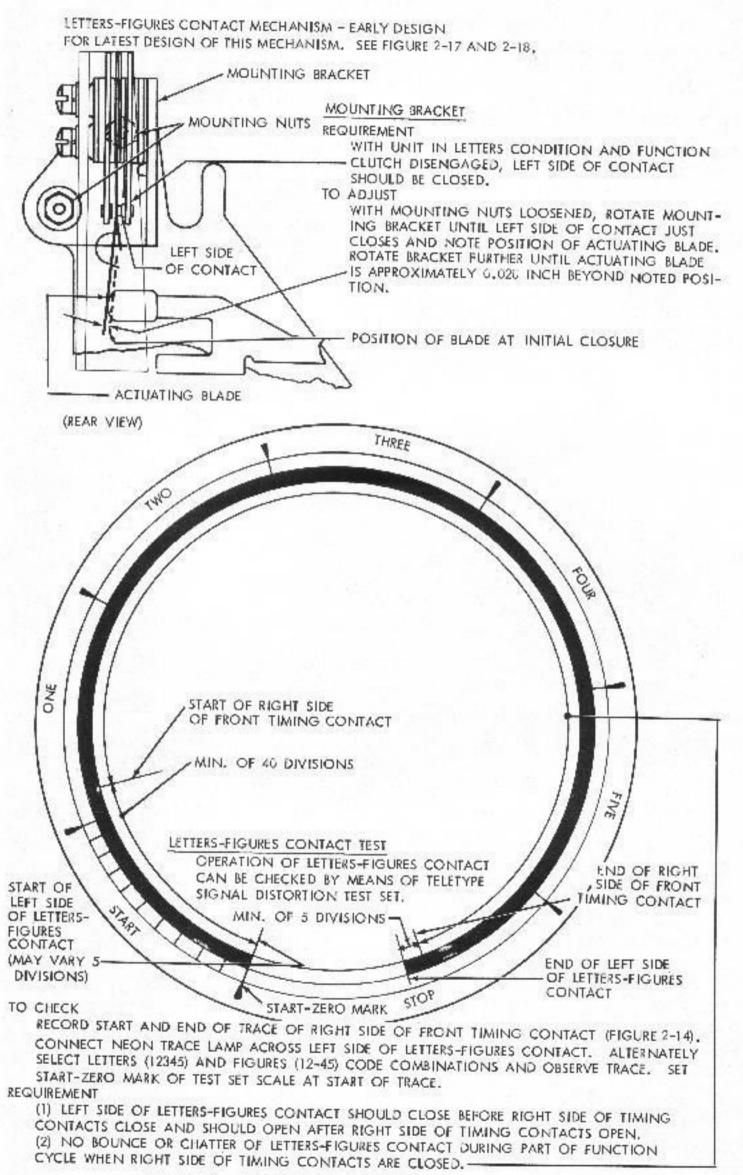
LETTERS-FIGURES CONTACT MECHANISM - EARLY DESIGN
